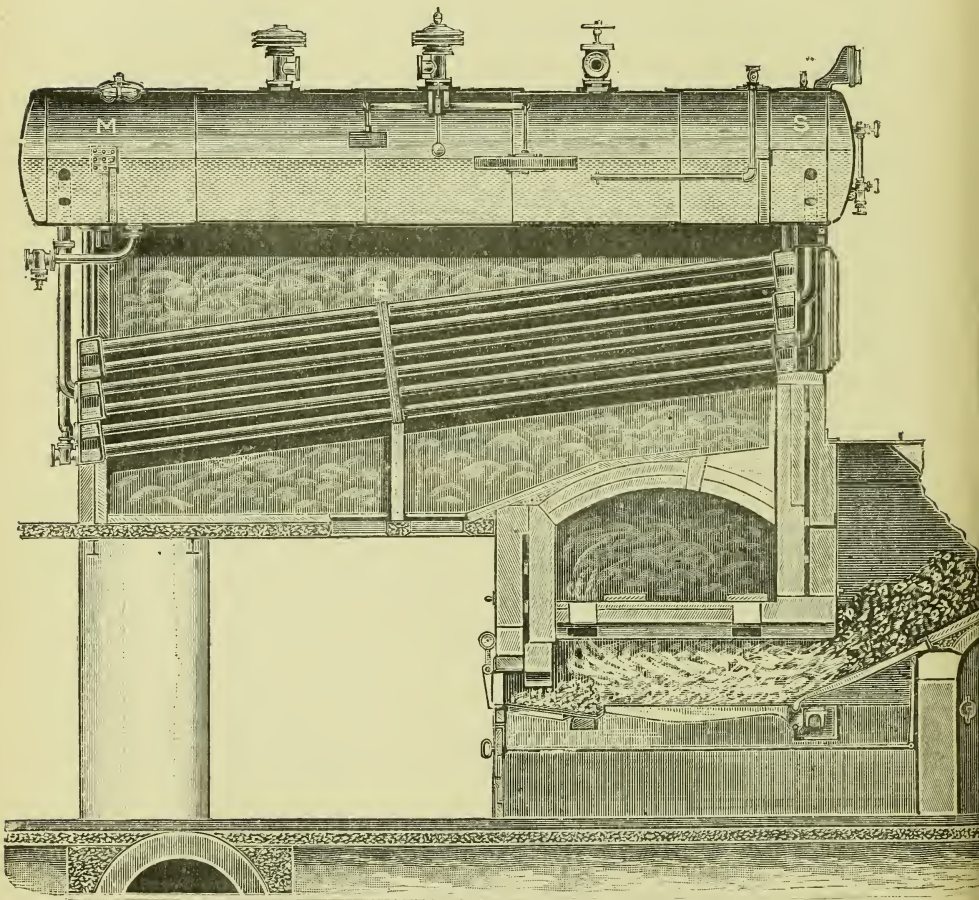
Healey's Refuse Furnace, showing boiler setting.
